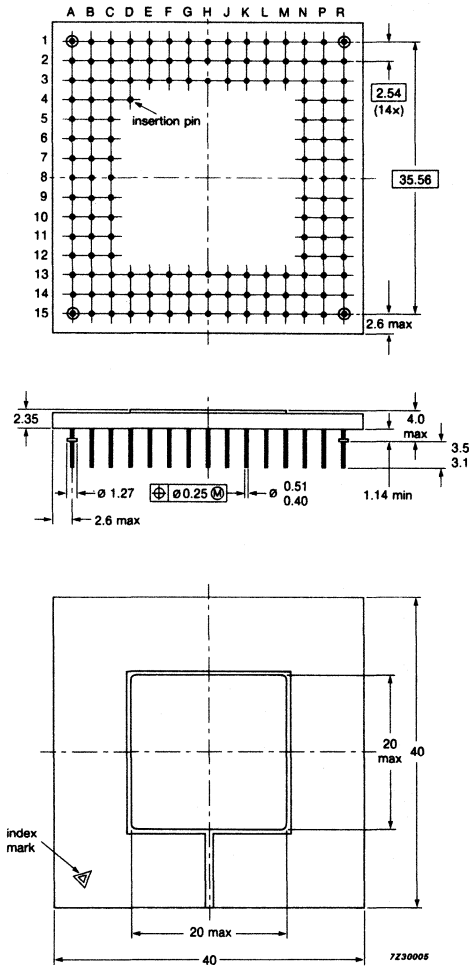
144-pin grid array (PGA) (NO275) package for the PCB5011.
